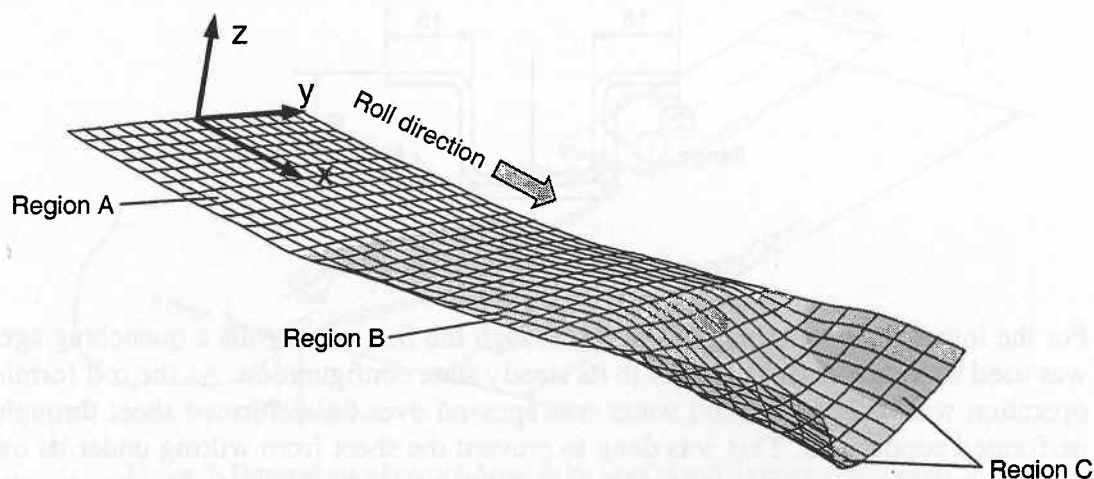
A typical surface representation of a partially deformed sheet formed through the first pass.
